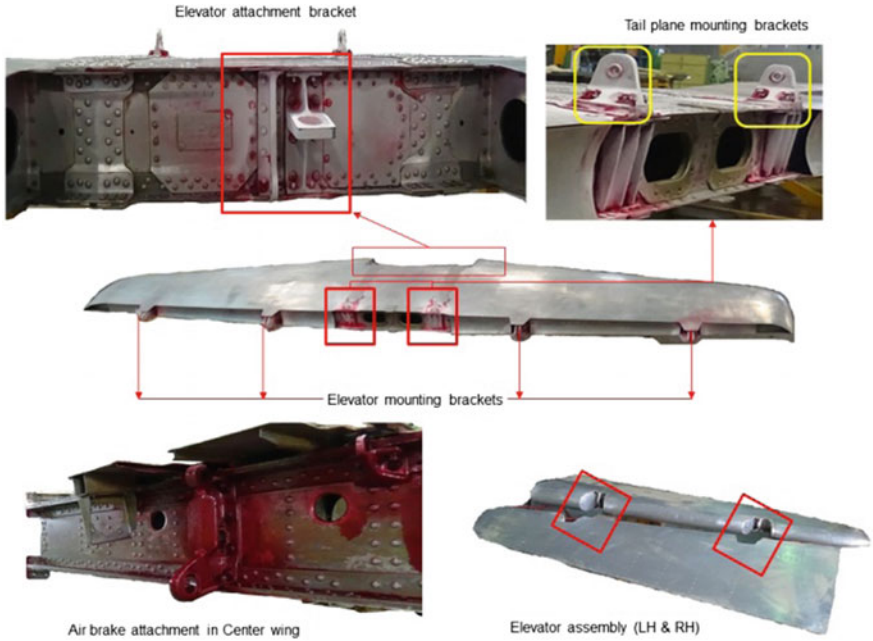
CD check areas of horizontal tail, air brake and elevator attachment
